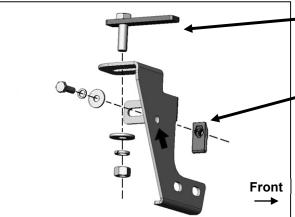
Remove rubber plug from driver/left side #2 mounting location. Insert 12mm Large Bolt Plate into hole as pictured (see Fig 6)
